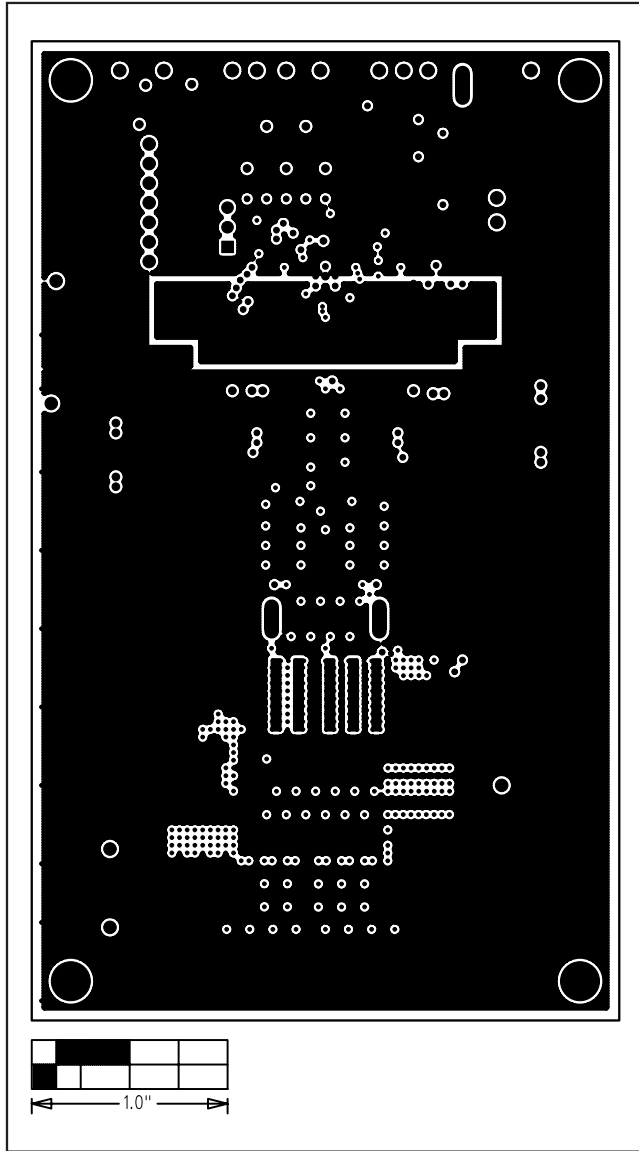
MAX17082 EV Kit PCB Layout—Internal Layer 2 (VBATT/PGND Plane)
